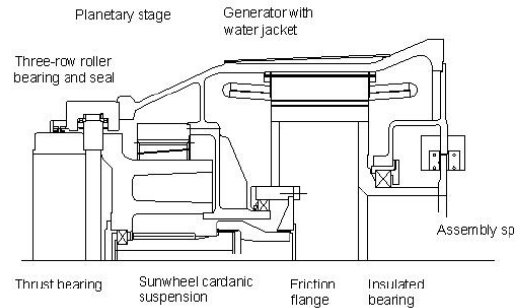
WinWinD drive train with integrated single stage planetary gearbox and generator [12]
